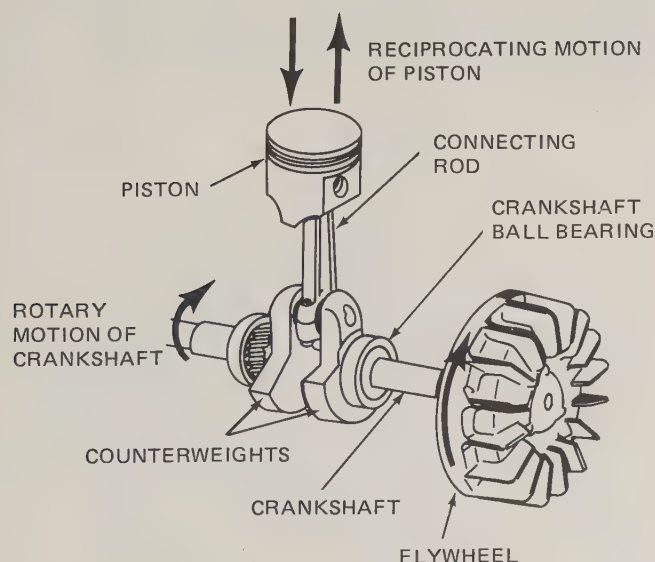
The crankshaft converts the reciprocating motion to rotary motion. The crankshaft mounts in bearings which encircle the journals so it can rotate freely.
